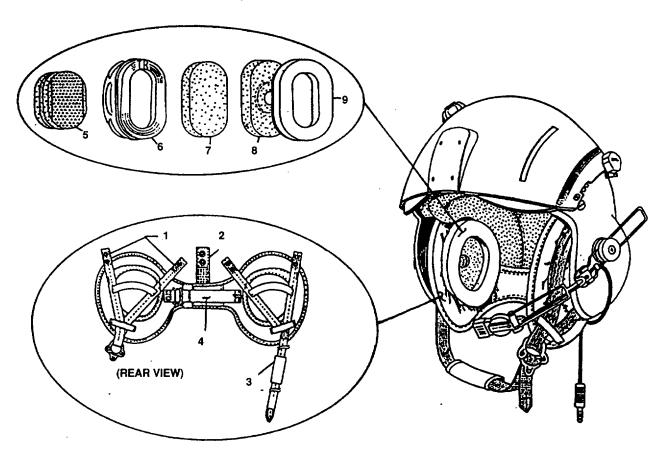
SPH-4B Retention and Earcup Assemblies
